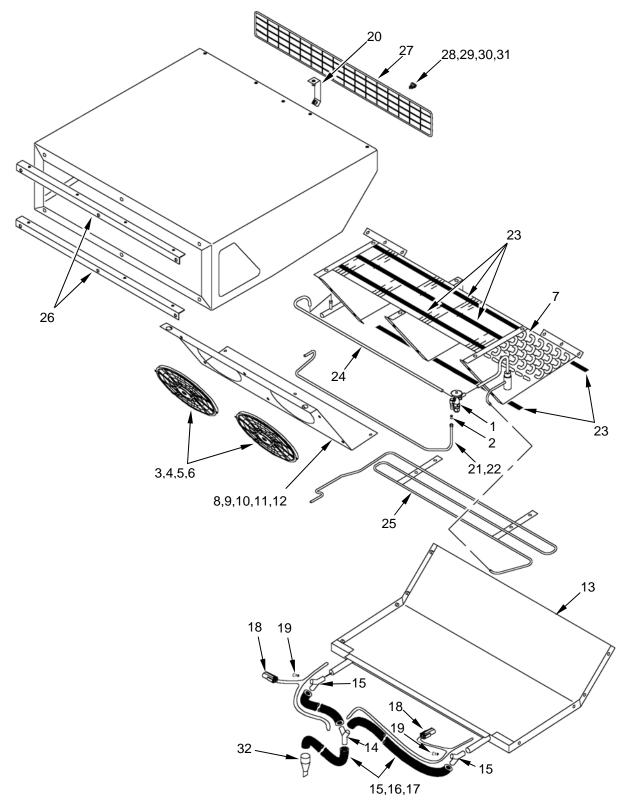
RU Evaporator Components (Sheet 2 of 2).
